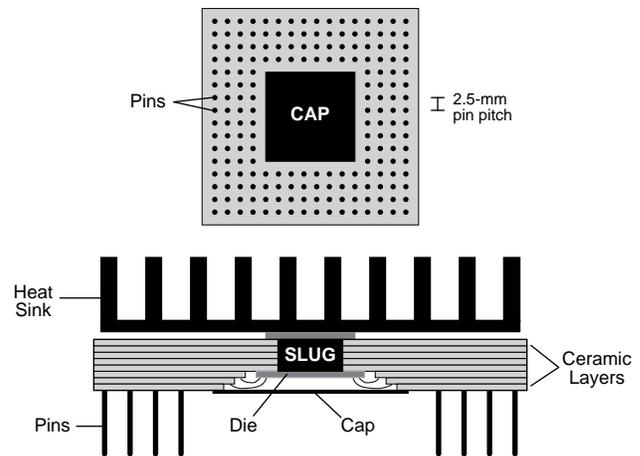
As shown at top, a pin-grid array (PGA) package has several rows of pins on the bottom. The cutaway view (below) shows the die mounted on layers of ceramic.
